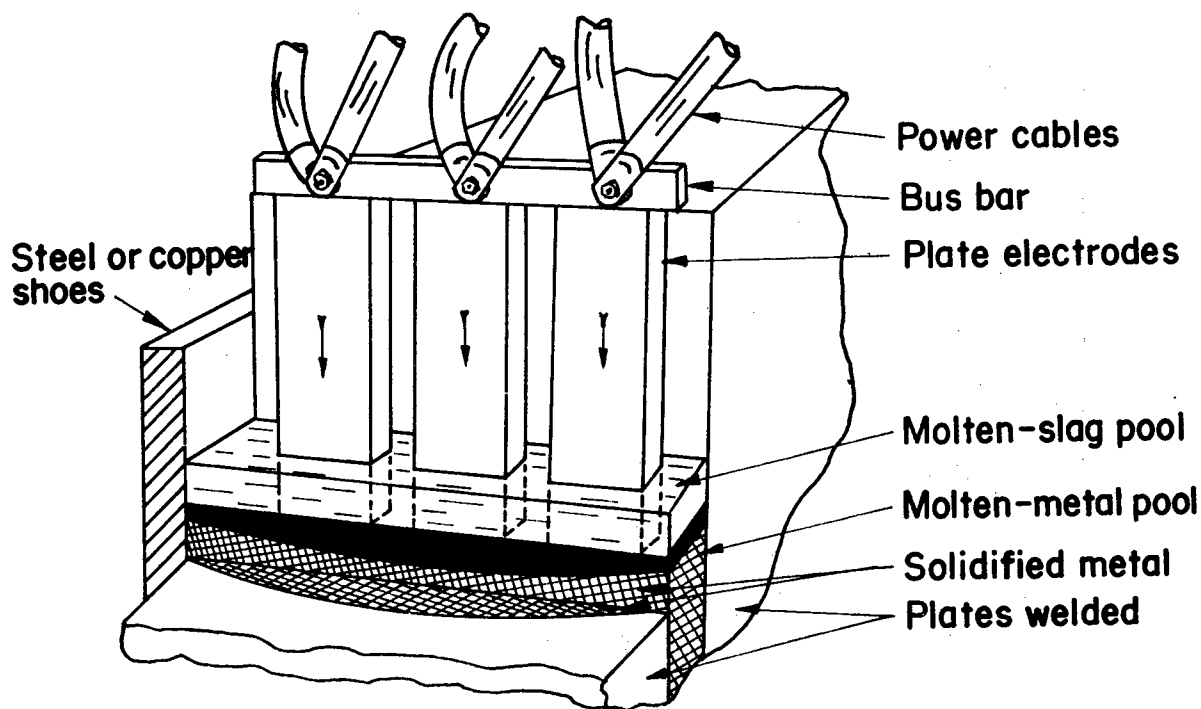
SCHEMATIC VIEW OF PLATE-ELECTRODE ELECTRO-SLAG WELDING
